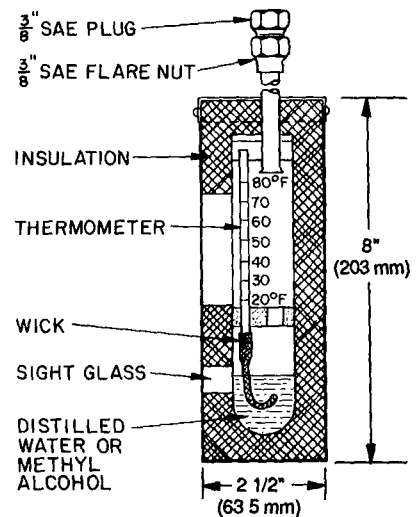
Typical Wet-Bulb Type Vacuum Indicator
